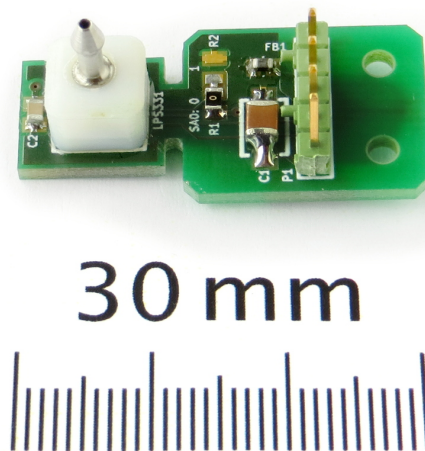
Sensor board for measurement of pressure in the gas line. The pressure sensor is located beneath the white cap ($7 \times 7 \times 6 \text{ mm}^3$). The shape of the PCB prevents bending of the sensor which would degrade the measurement.
